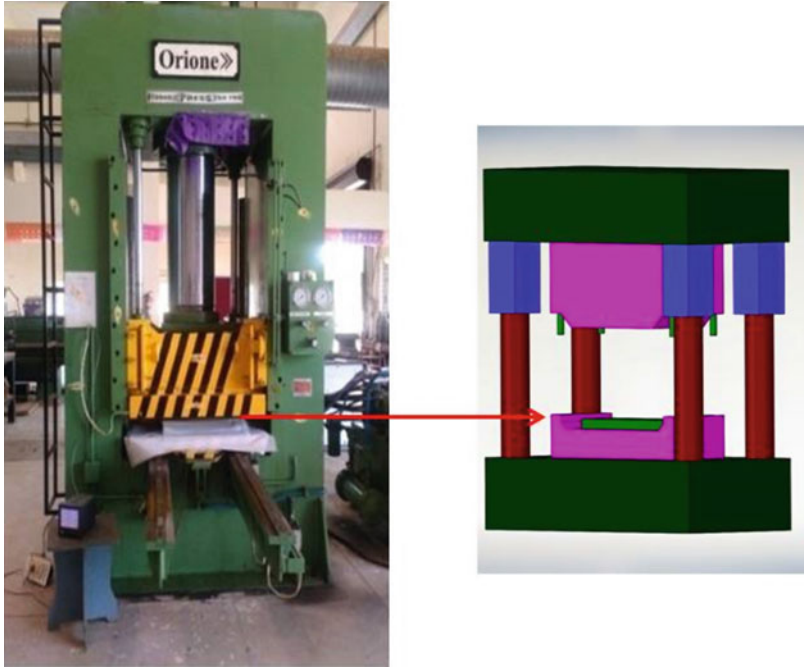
Photograph of laminating hydraulic press and schematic drawing of mold
